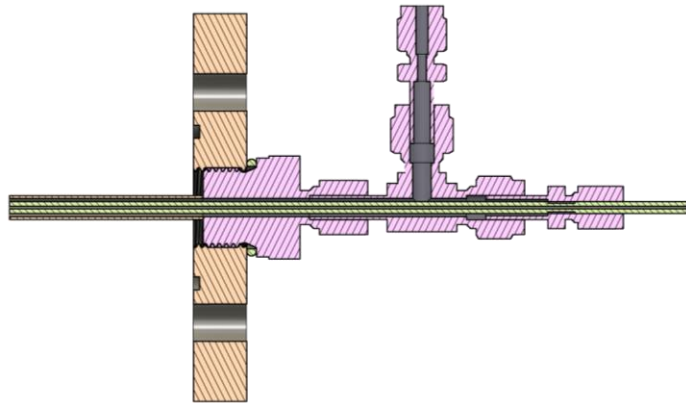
Co-flow nozzle cross-sectional view in the inlet flange.
